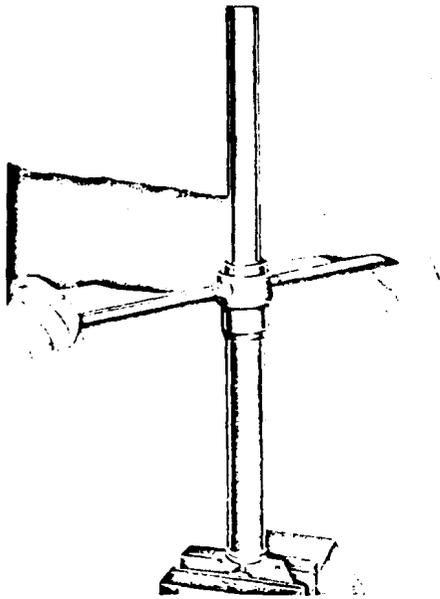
Loosening and tightening the threaded ring by means of the combined assembling spanner
